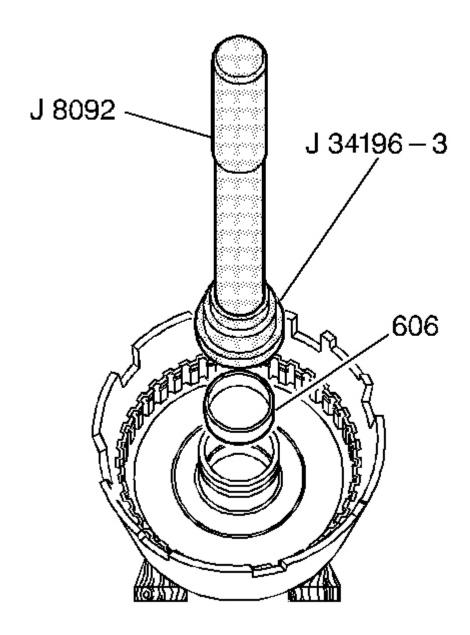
Installing Reverse Input Clutch Rear Bushing Courtesy of GENERAL MOTORS CORP.
